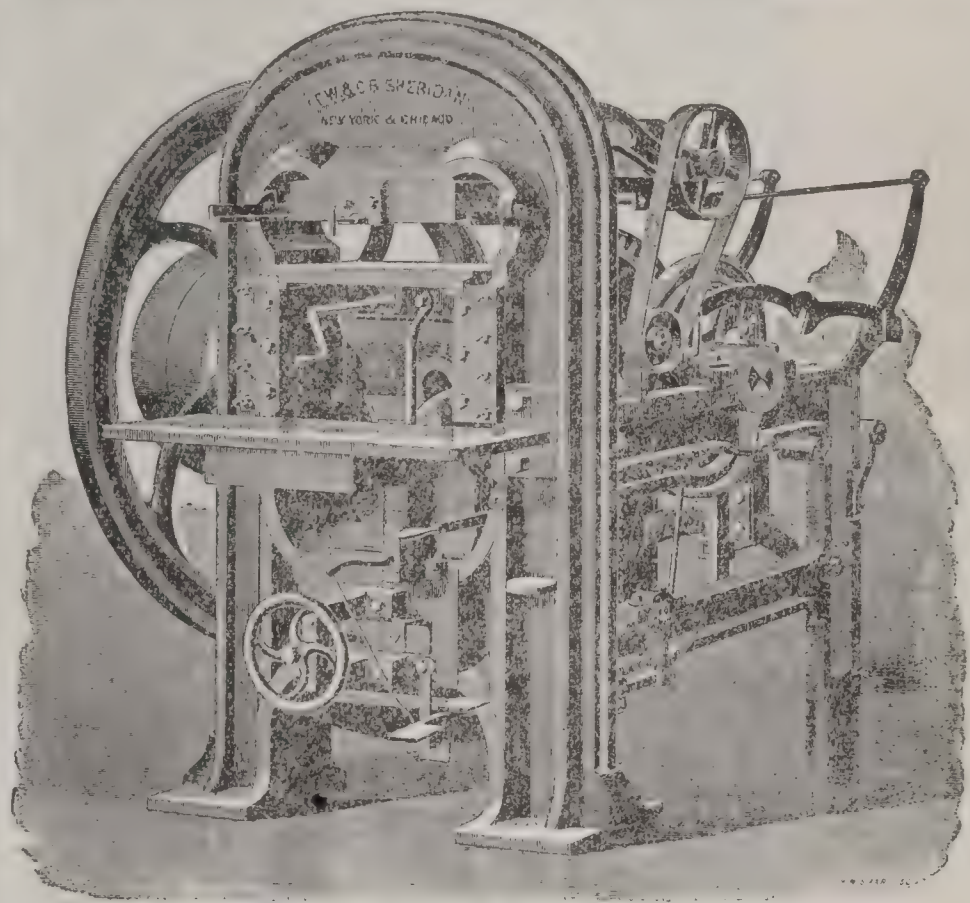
Inking and Embossing Press. Also used as a Smashing Machine.
